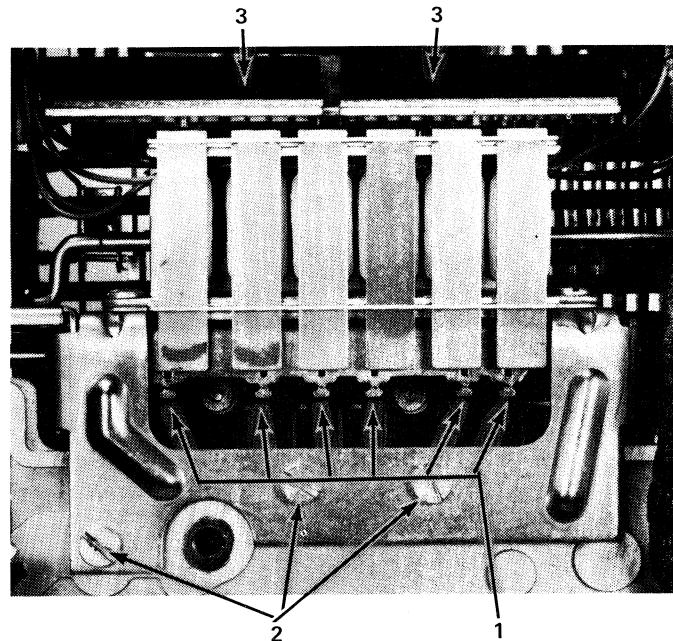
Selection Magnets and Selection Interposer Removal (Bottom of Printer)
